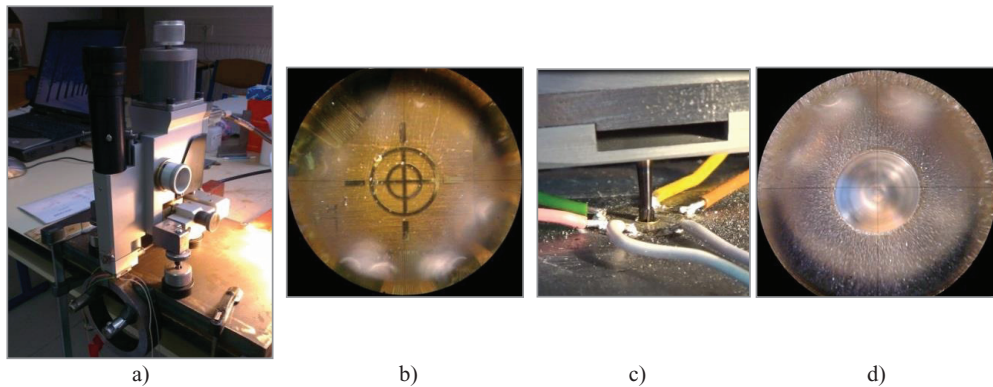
Measuring residual stresses using IHDM: a) MTS3000 device, b) rosette before hole drilling, c) drilling hole during measuring, d) drilled hole after measuring
